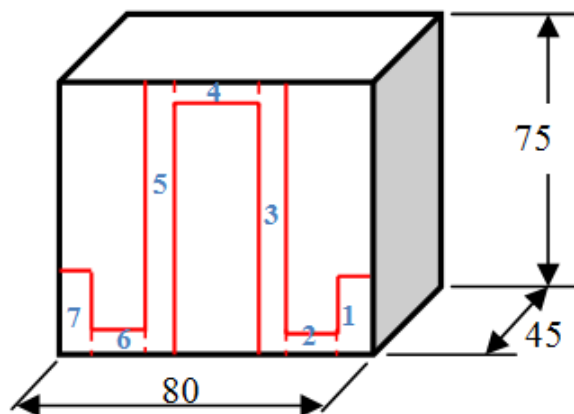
38. Schematic illustration the dimensions of a solid block which used for machining the part. All dimensions are in mm.
